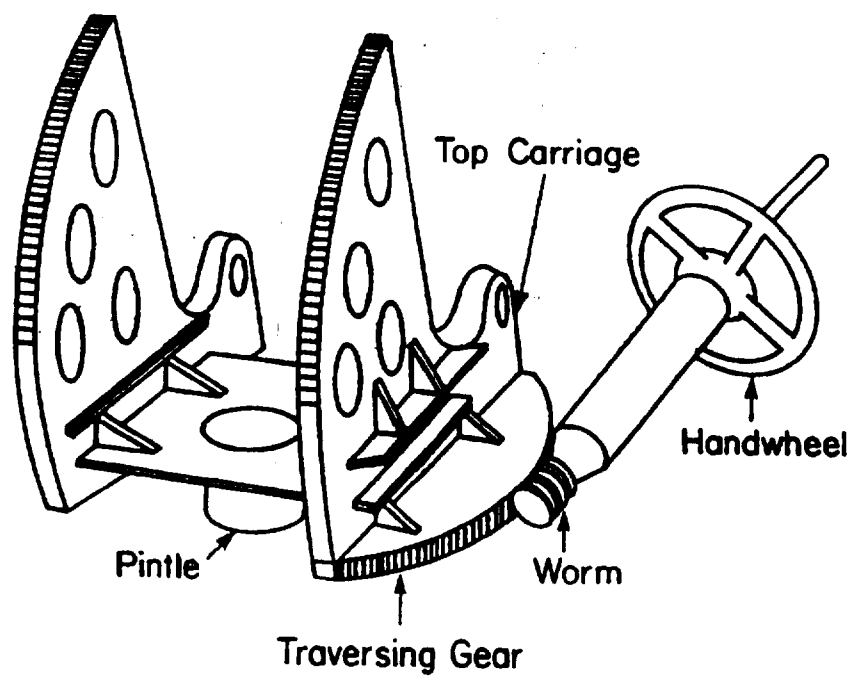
Traversing Mechanism With Gear on Top Carriage
